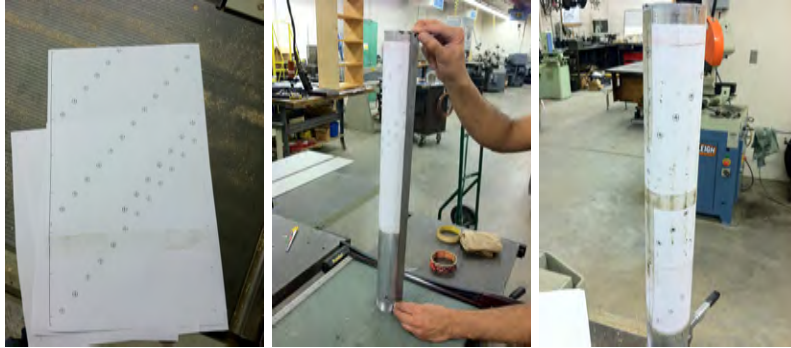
Drill hole locations were printed directly from MATLAB onto a sheet of paper. Paper was then wrapped around the center column pipe. This resulted in well-aligned drill holes for the tie-back inlets and outlets.
